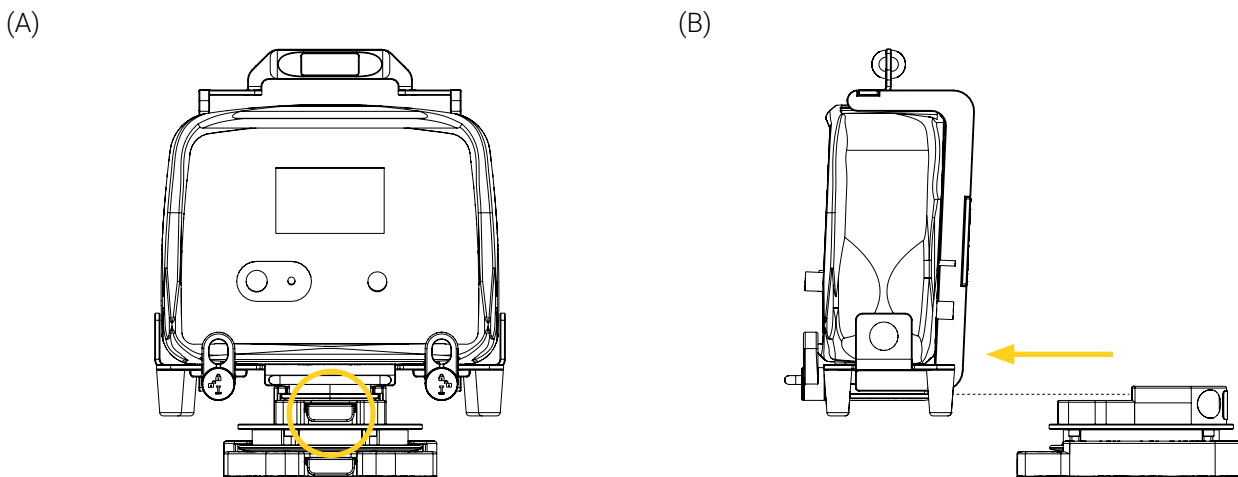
Removing the mounting bracket from the Surface Converter Pro
